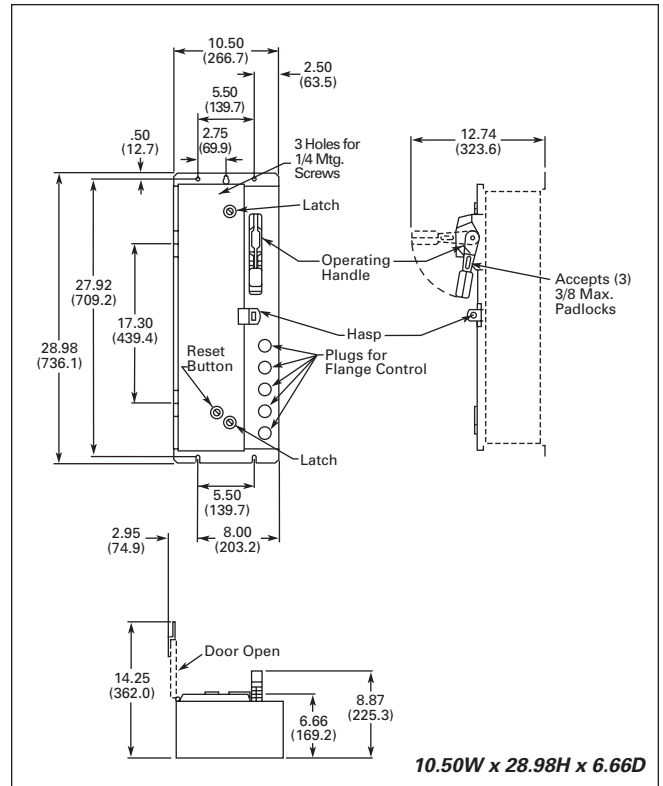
Box A, Type 12 — Approximate Dimensions in Inches (mm)
